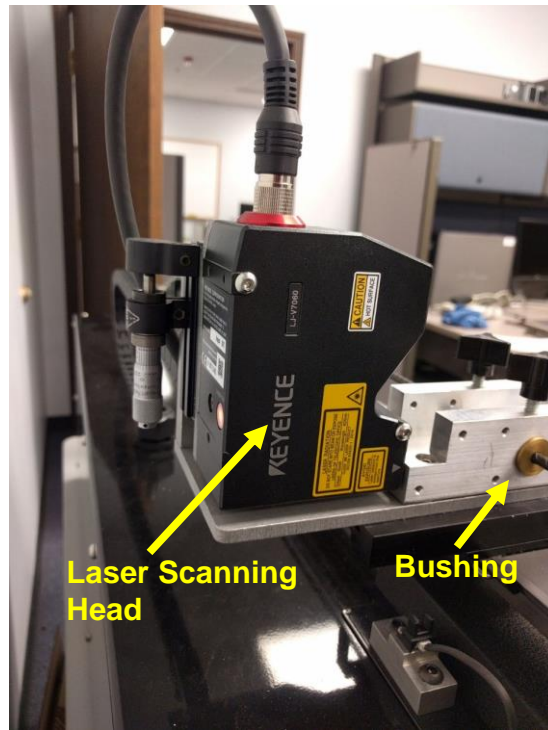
Close-up of Scanning Head and Bushing Guide
